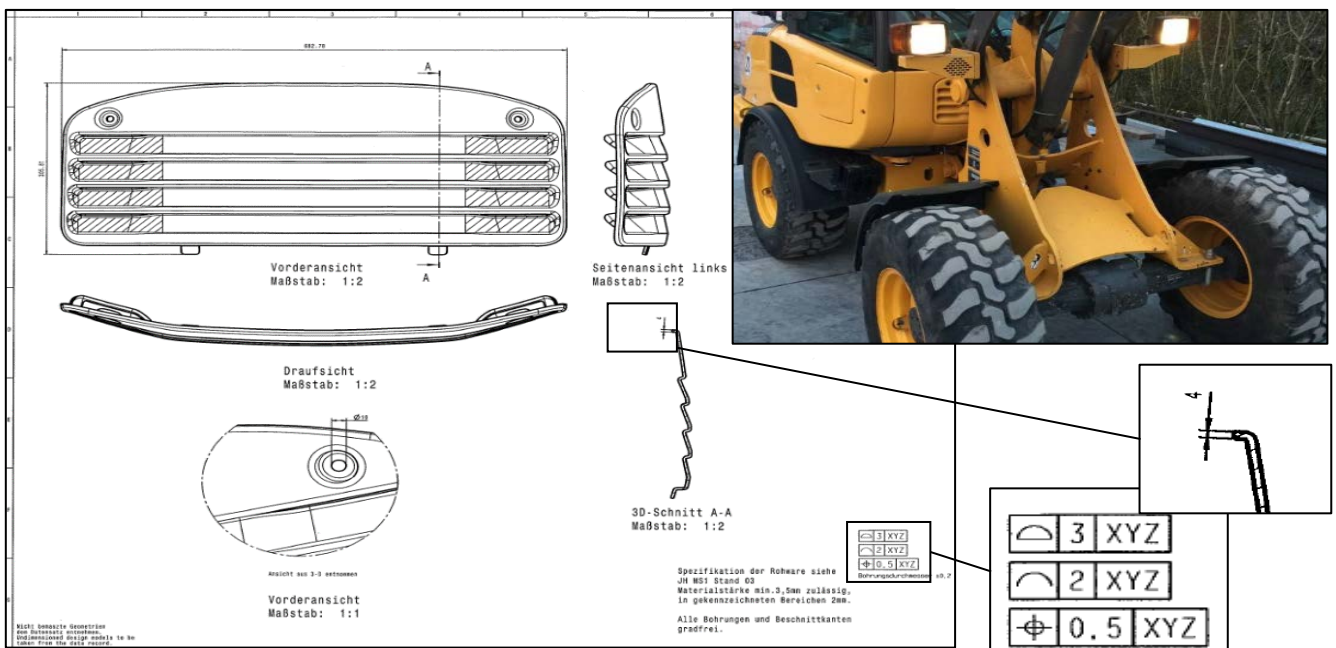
Drawing cut out – a plastic part of compact wheel loader cabin front area.
